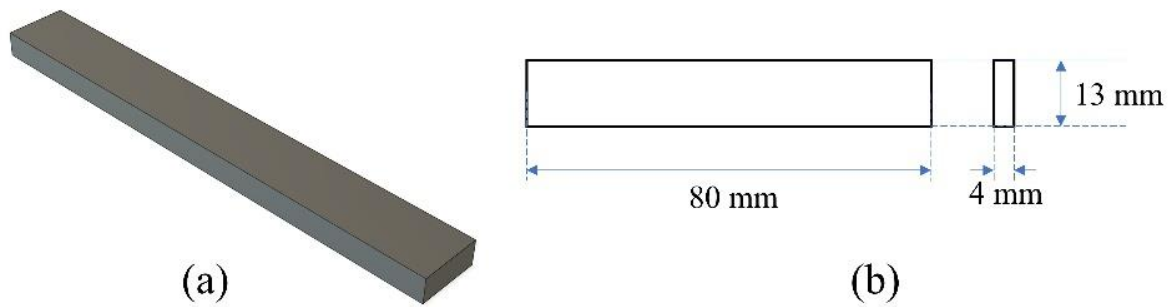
(a) Prismatic specimen (b) Specimen's dimension
